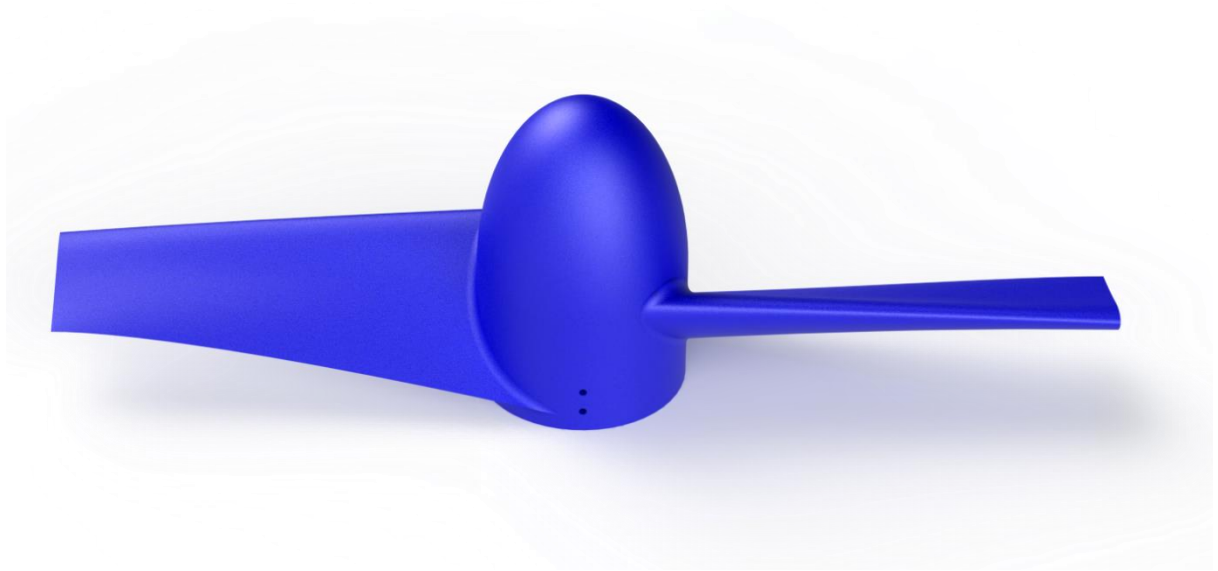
The 3D printed impeller assembly. The impeller is comprised of 3 parts namely hub, blade, and nose cone.
